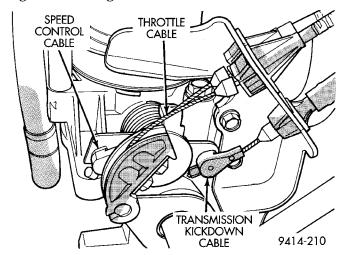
Throttle Body Cables Attachment to Throttle Body
